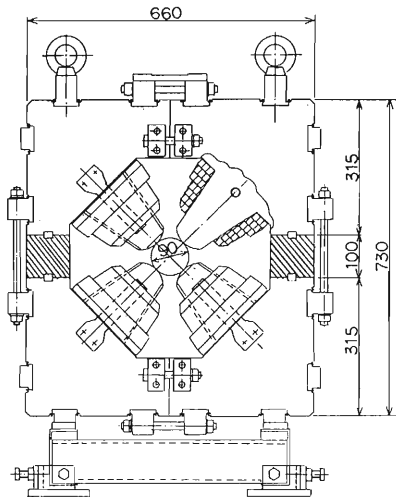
Cross-sectional view of a prototype quadrupole magnet.
